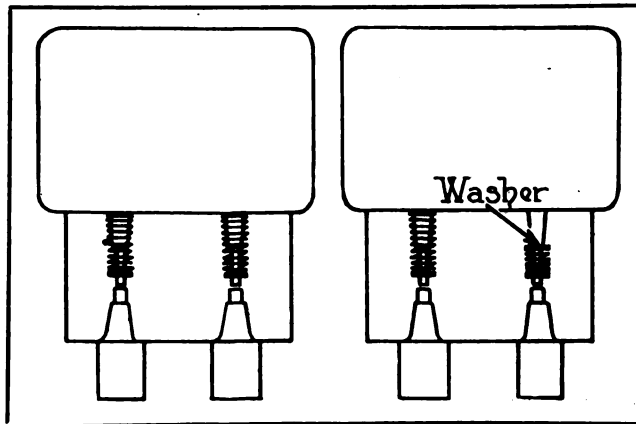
Large Washer Placed Against Bottom of Valve Guide Affords Broken Spring Sufficient Tension to Properly Close Valve.
